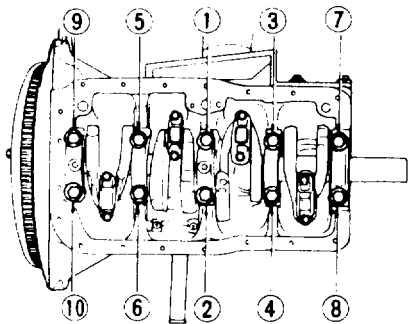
Torque Sequence of Main Bearing Cap Bolts.
